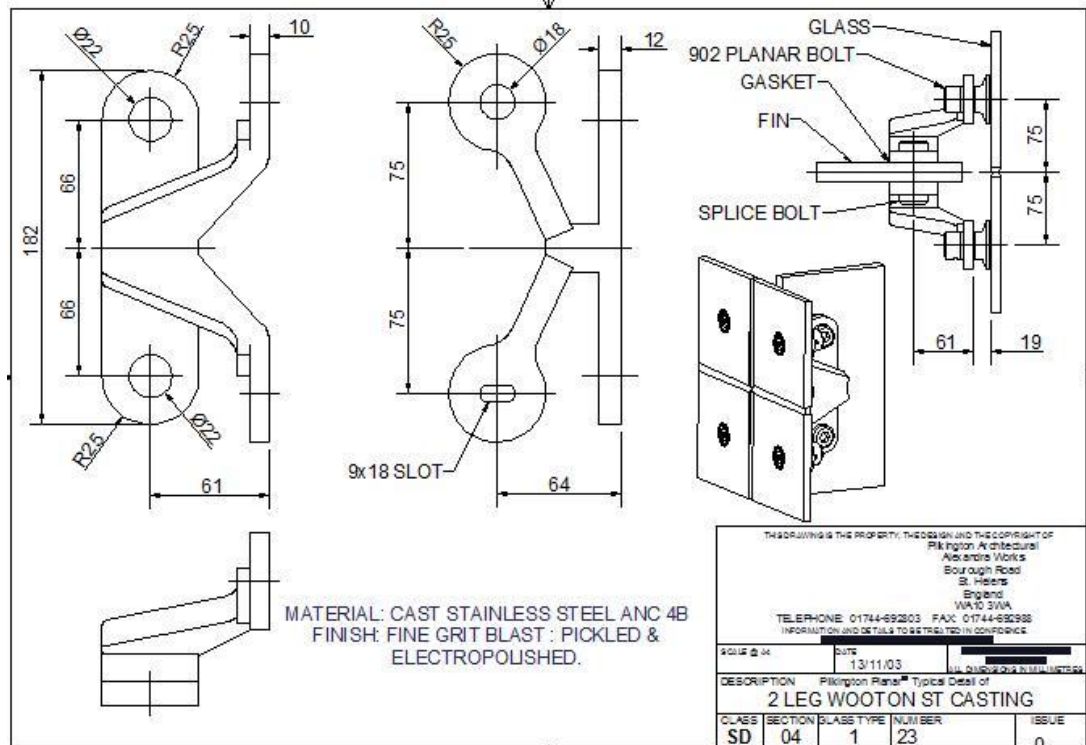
2 Leg Wooton Casting to Glass Curtain Wall (Pilkington, 2009).
